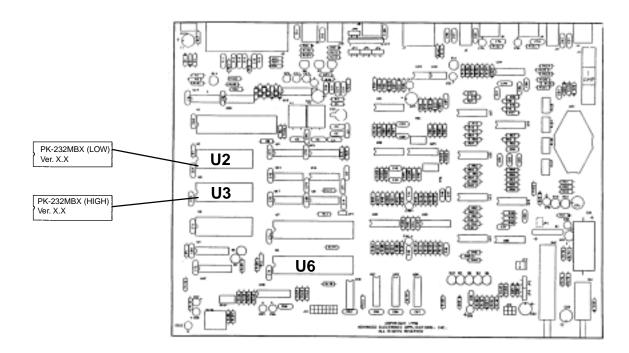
MBX Main Board (No MBX daughter board necessary)
